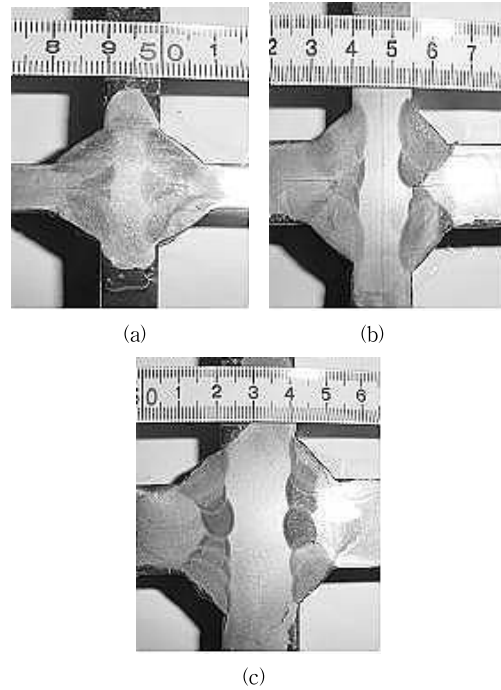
Cross sections of cruciform fillet welded joints ; (a) 2-pass($t_1=10\text{mm}$), (b) 2-pass ($t_1=15\text{mm}$), (c) 3-pass($t_1=20\text{mm}$)
